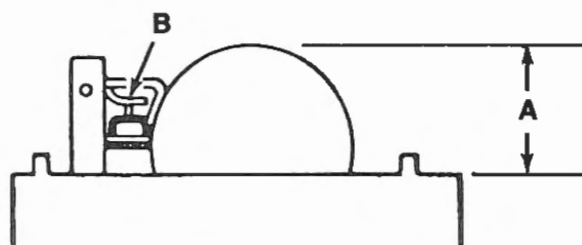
Float level (A) on Mikuni VM24SS should be 23.5-25.5 mm (0.92-1.00 in.). Bend float arm tang (B) to adjust.
